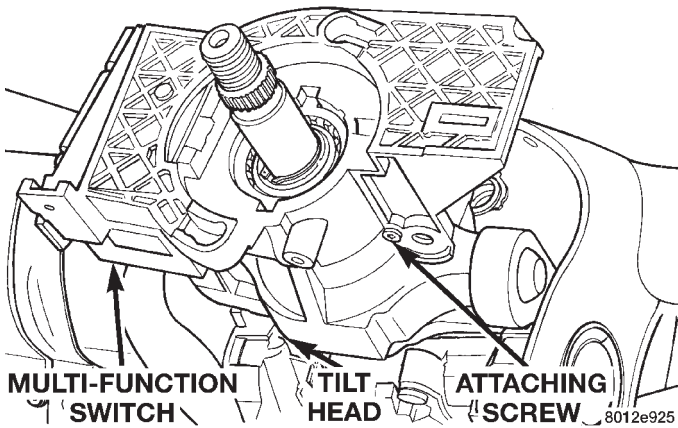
Multi-Function Switch Mounting Housing Attaching Screw
